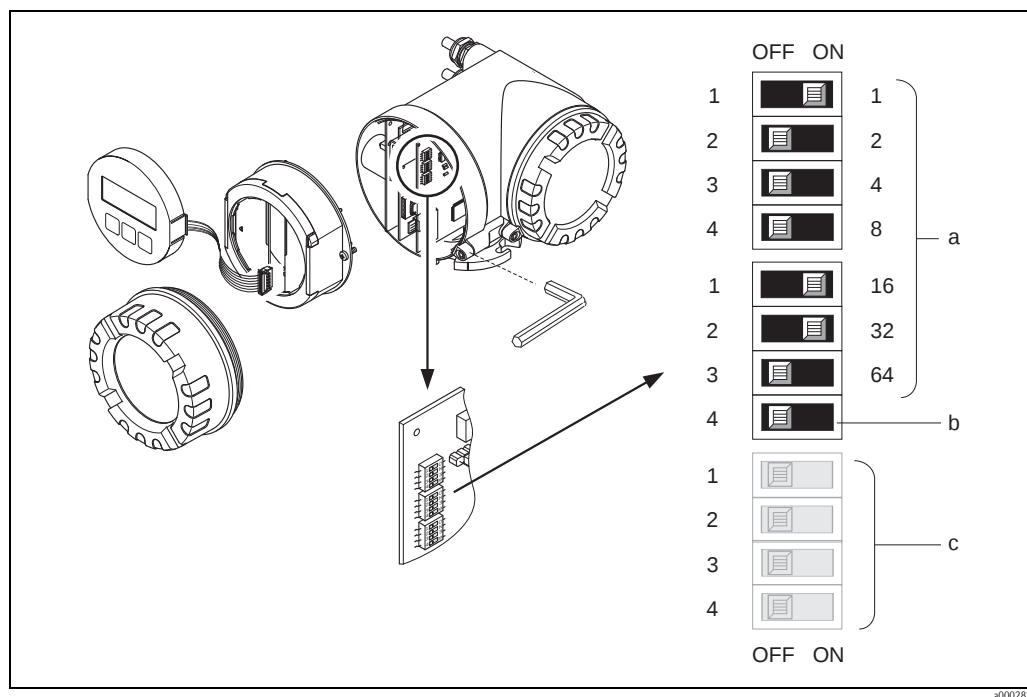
Addressing with the aid of miniature switches on the I/O board
